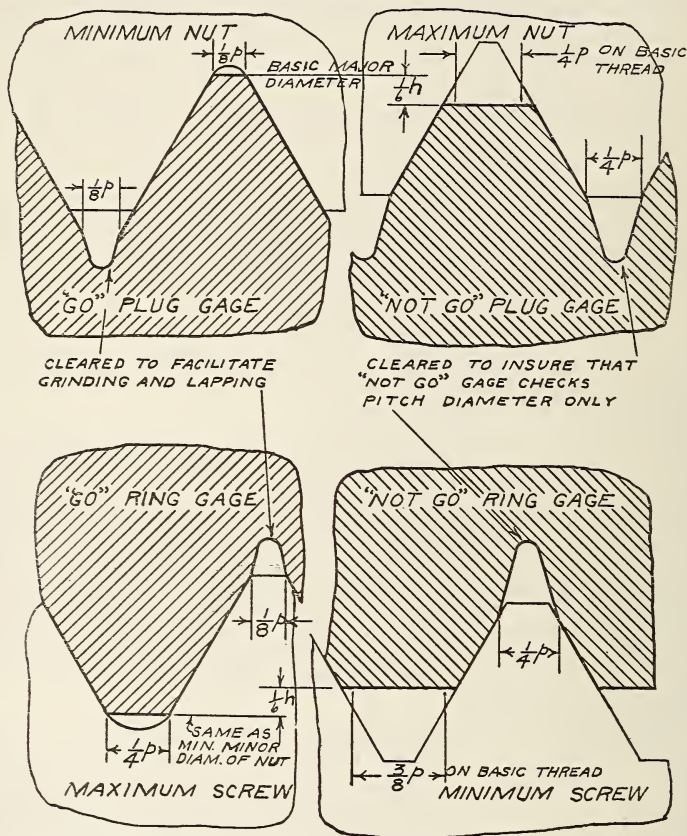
Thread form of "go" and "not go" thread plug and ring gages.
